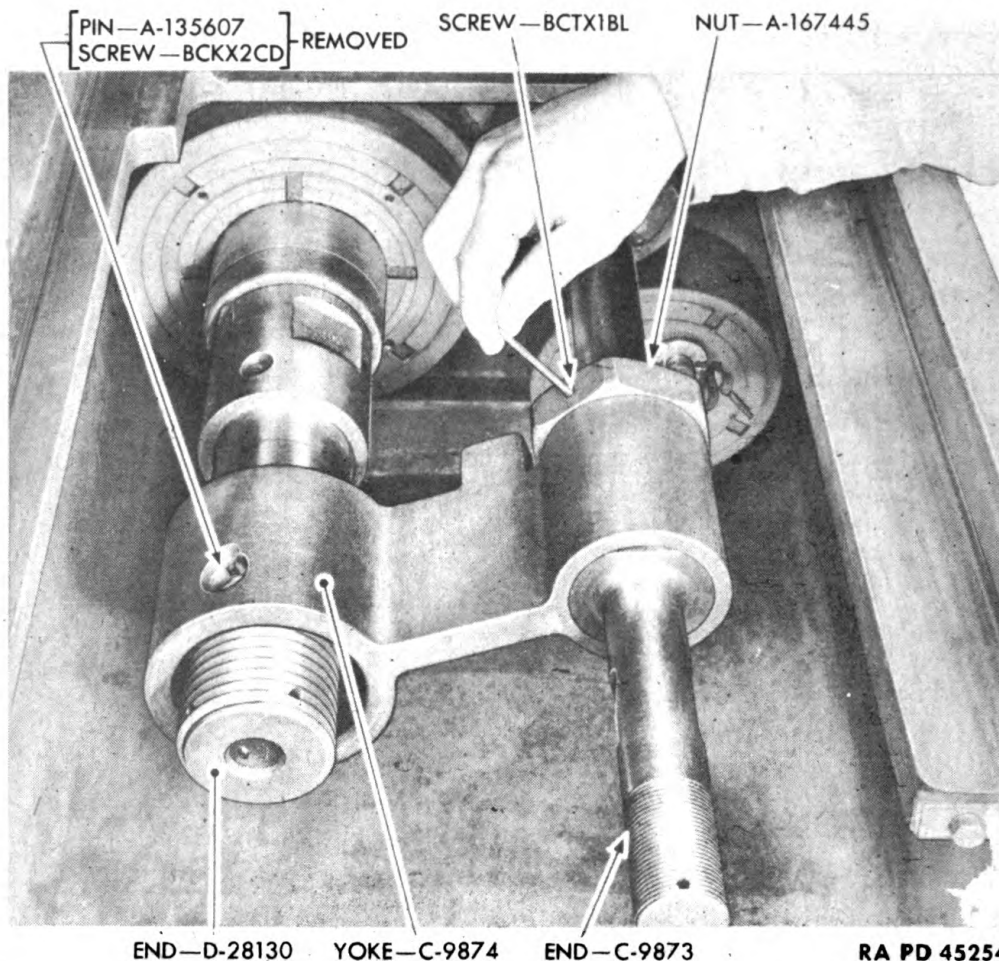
Removing Screw from Nut on Counterrecoil Piston Rod End
